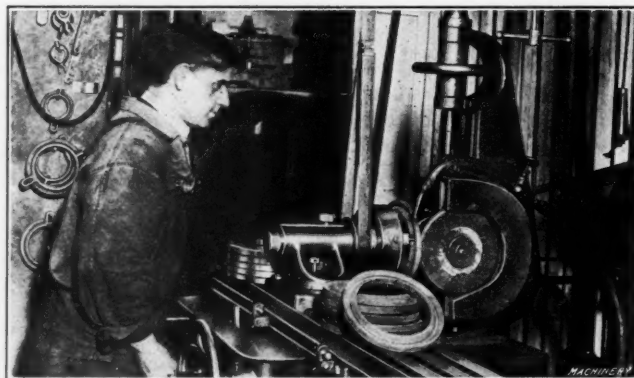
Grinding Thrust Bearing Rings on a Bath Grinder
